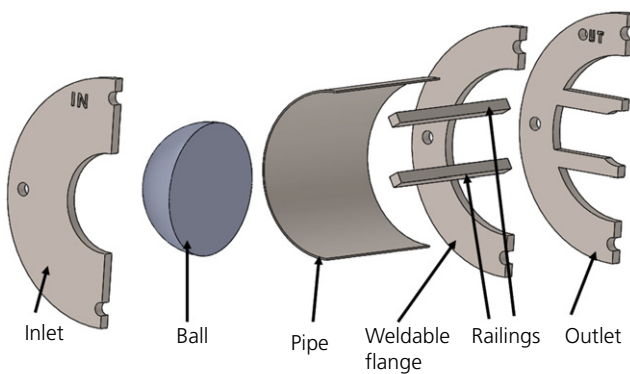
Exploded cross-sectional view of the one-way check valve, viewed from the inlet
